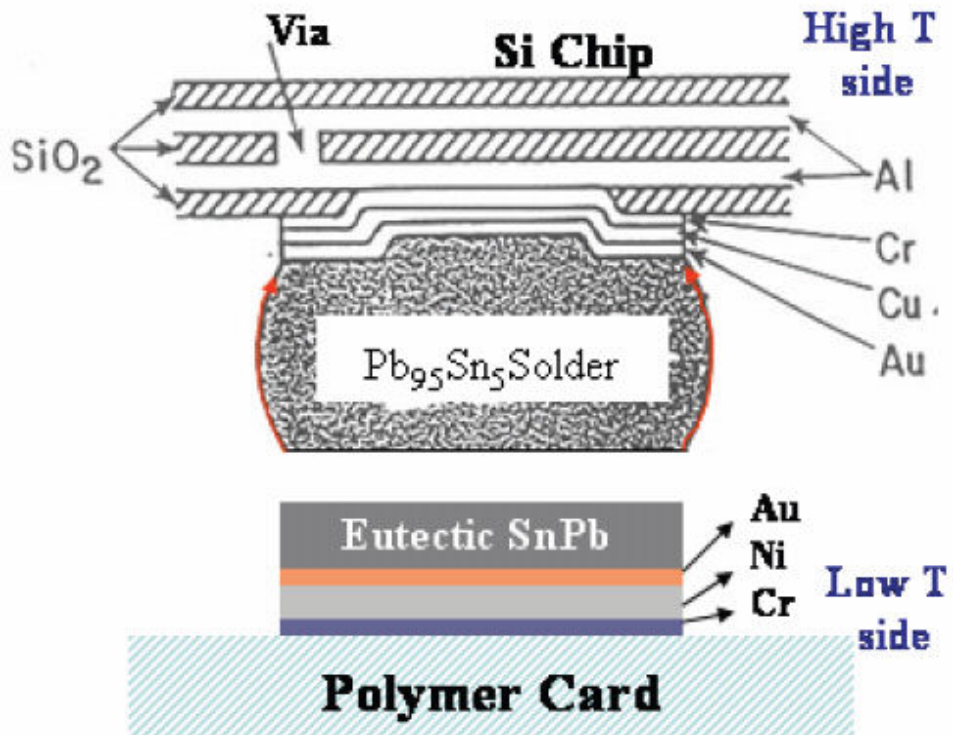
Schematic diagram of the composite solder joint. The thin eutectic solder can be deposited on the organic substrate before joining.
